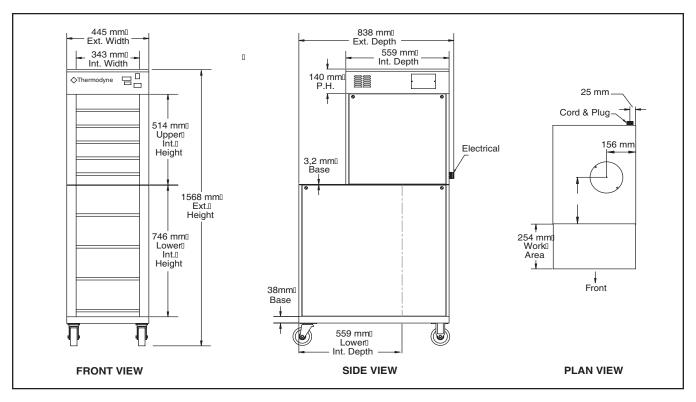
Outline Dimensional Drawing, 1600 NDNL
